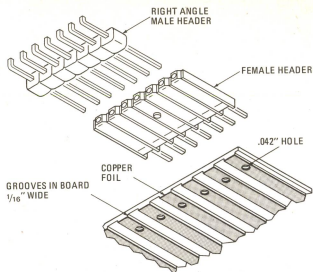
HEADERS FORM CONNECTORS as auxiliary boards are plugged into the motherboard or main frame.
